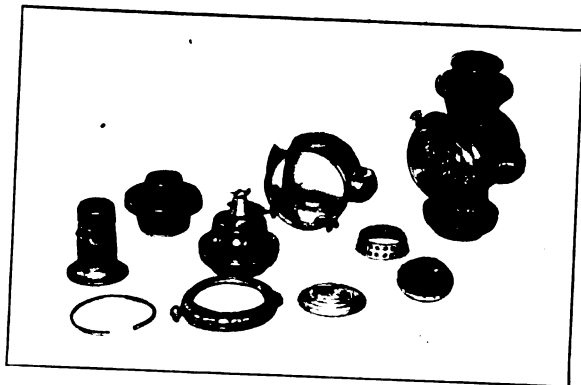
AN OIL-BURNING LAMP AND PARTS
